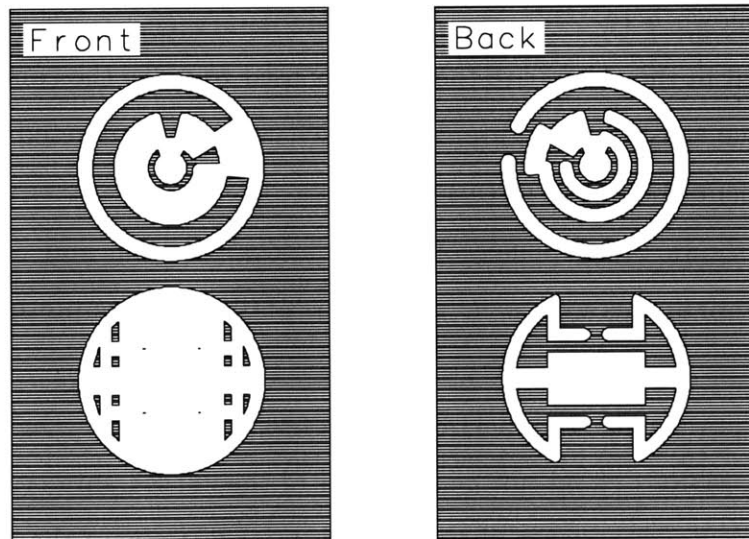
Front and back sides of typical suspension and force sensor flexures, post-etching (from lower left corner of flexure sheet in figure B-1). Front side shows boss surfaces for clamping to TeMPeST 1-D body and core, back side shows cantilever and break-out tabs.
